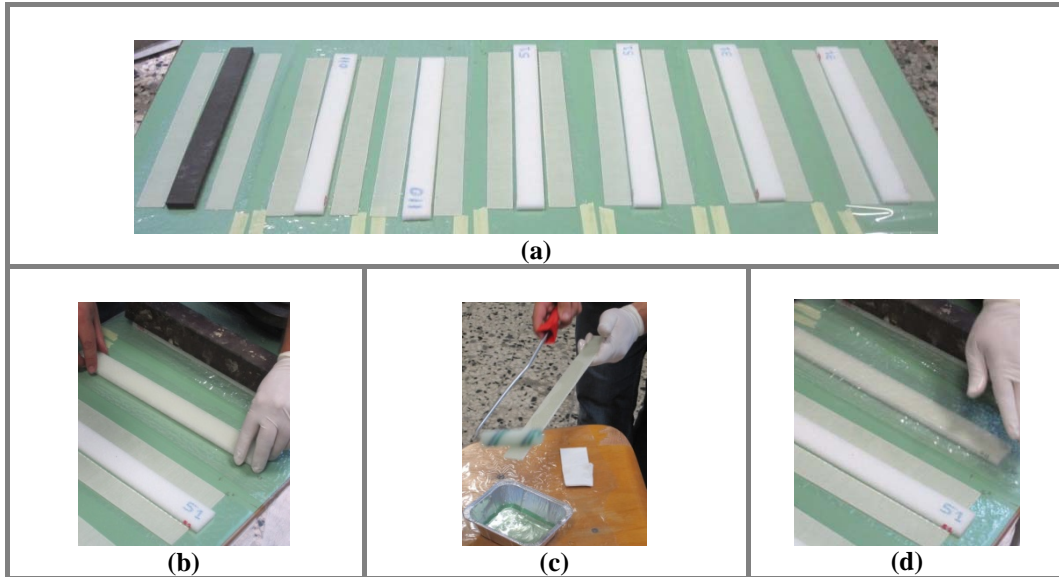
Preparation of sandwiches coupons: (a) PMI, PA core and GF/Epoxy skins; (b) gluing and positioning of core to lower skin; (c) wetting a skin with epoxy resin; (d) positioning of top skin to core and placement of a protecting transparent film.
